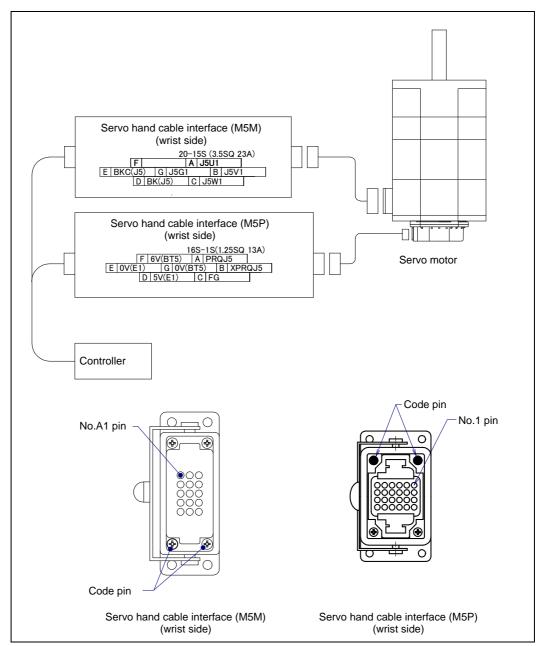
(f) Pin layout for the servo hand cable interface
